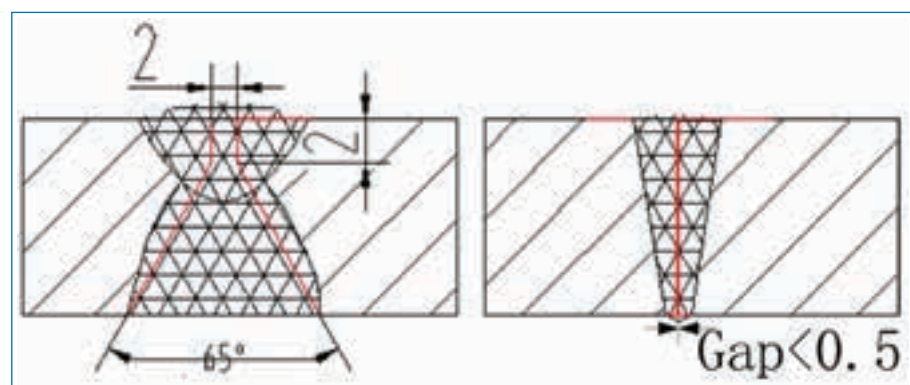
The welding and formation quality of the longitudinal welding seam.
